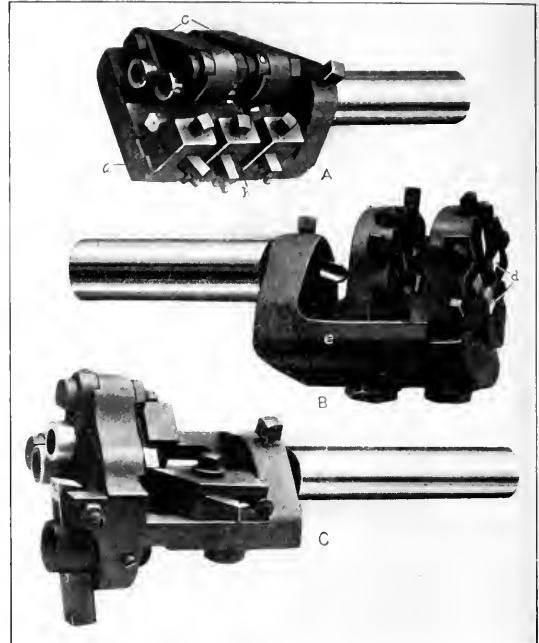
Multiple Turning Tool, Adjustable Hollow Mill and Standard Three-tool Box-mill
